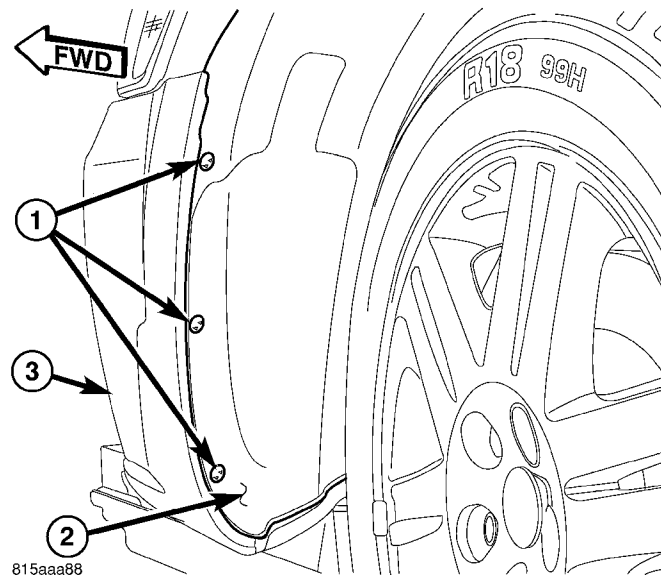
WHEEL HOUSE (Left shown, right similar)
